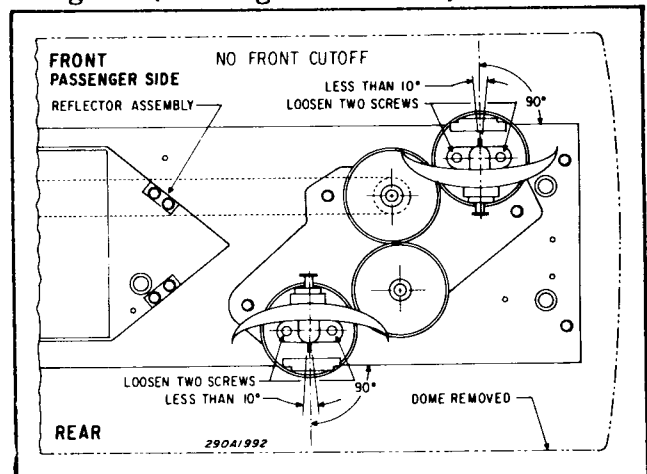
Reflector Assembly Adjustment. (No Front Cut-Off.)
